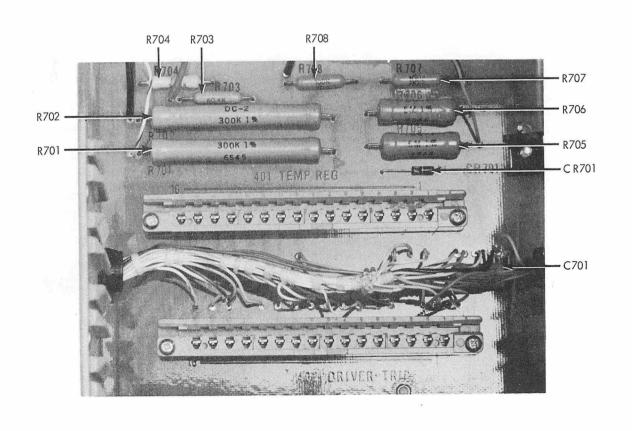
FRONT MOTHER BOARD ASSEMBLY
